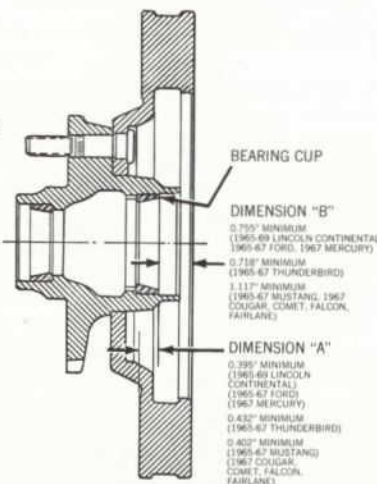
Fixed Caliper Rotor Limiting Dimensions
